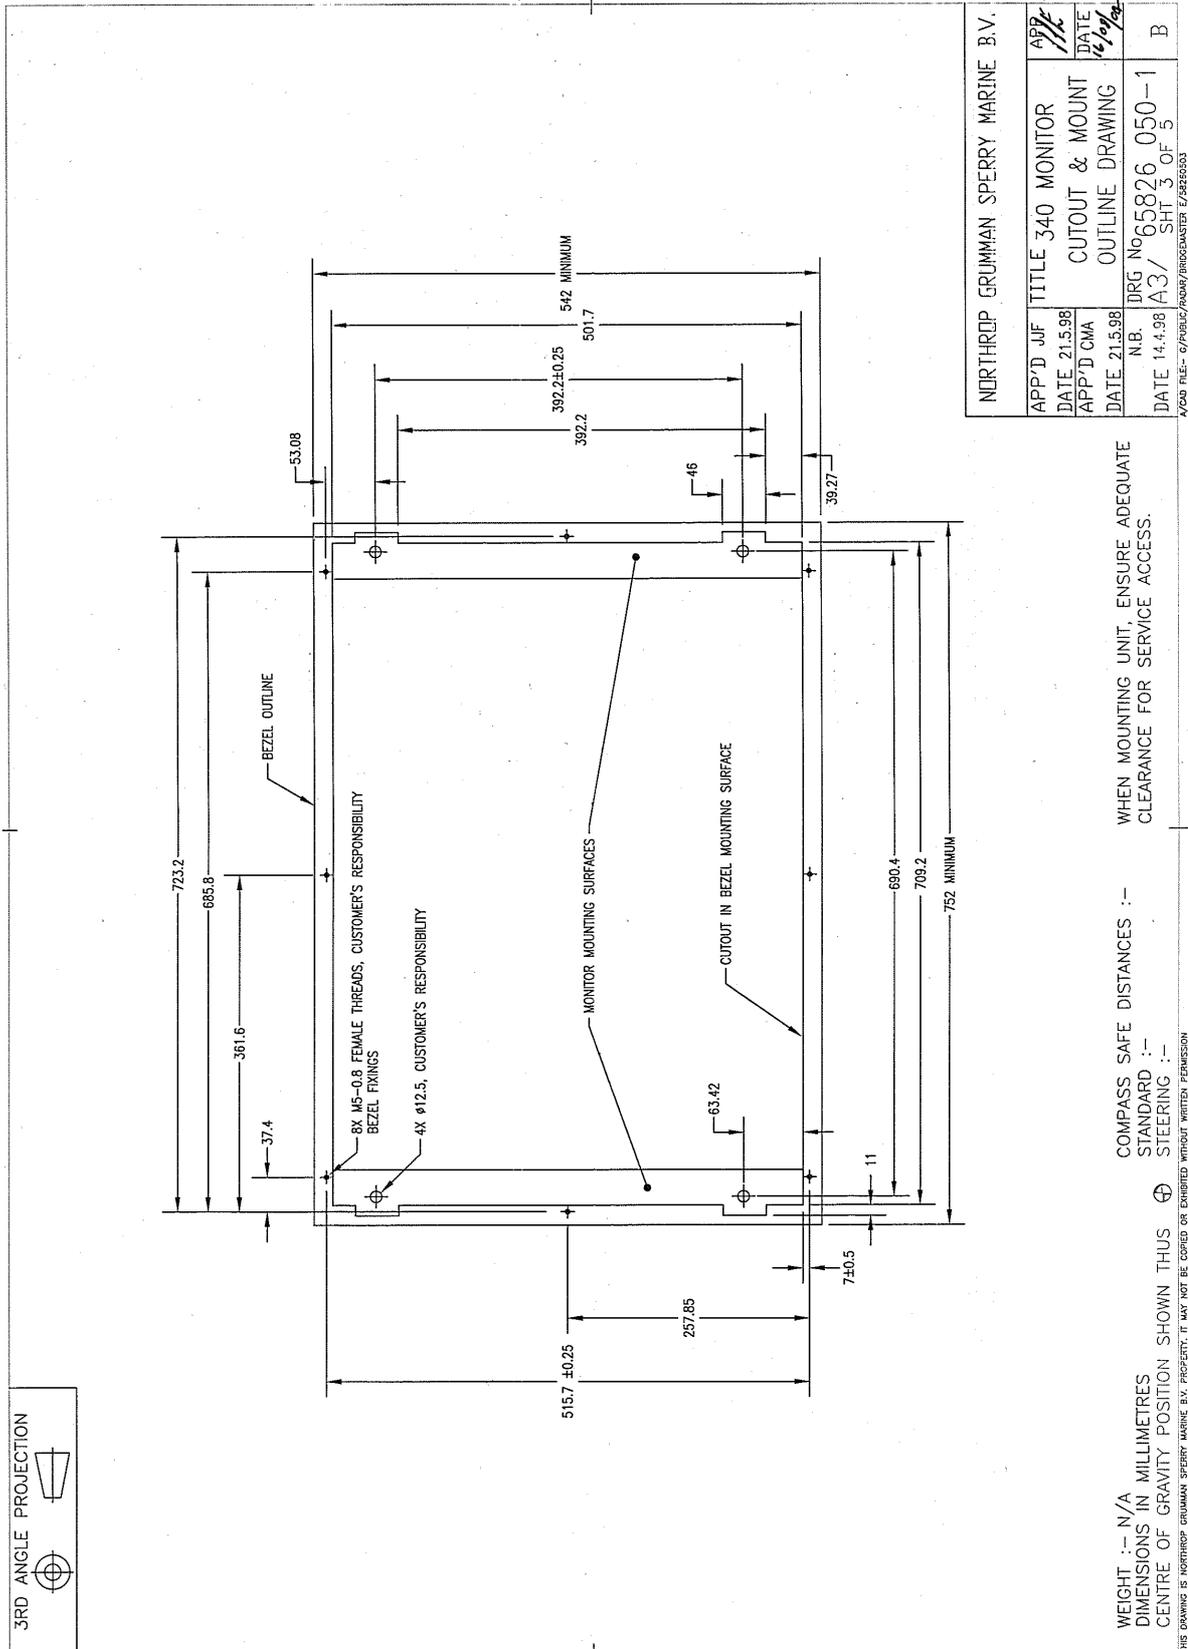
340 Monitor Module (CRT) Outline Drawing (Sheet 3 of 5)
